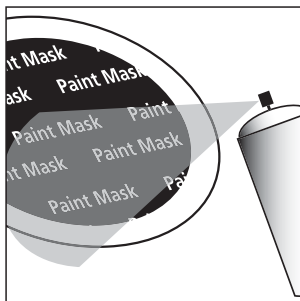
Mask the drivers and baffles, then spray paint in thin coats.
